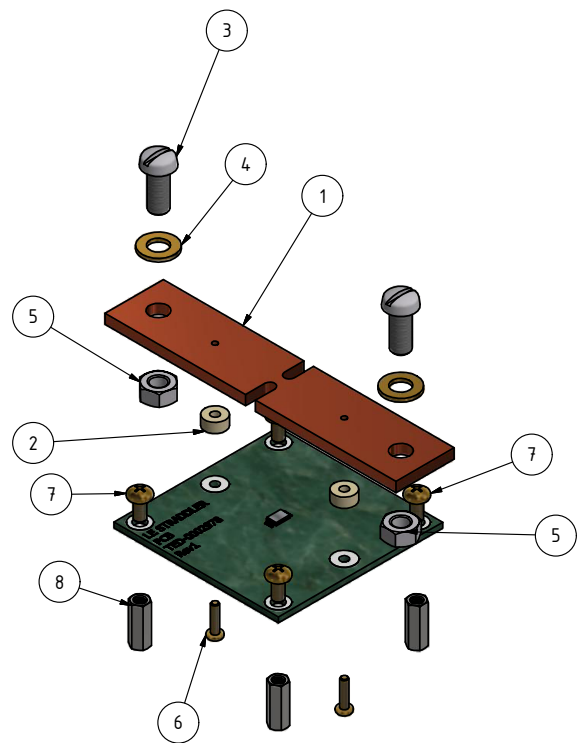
Exploded view of the ASEK37610, EVB, Busbar evaluation board
